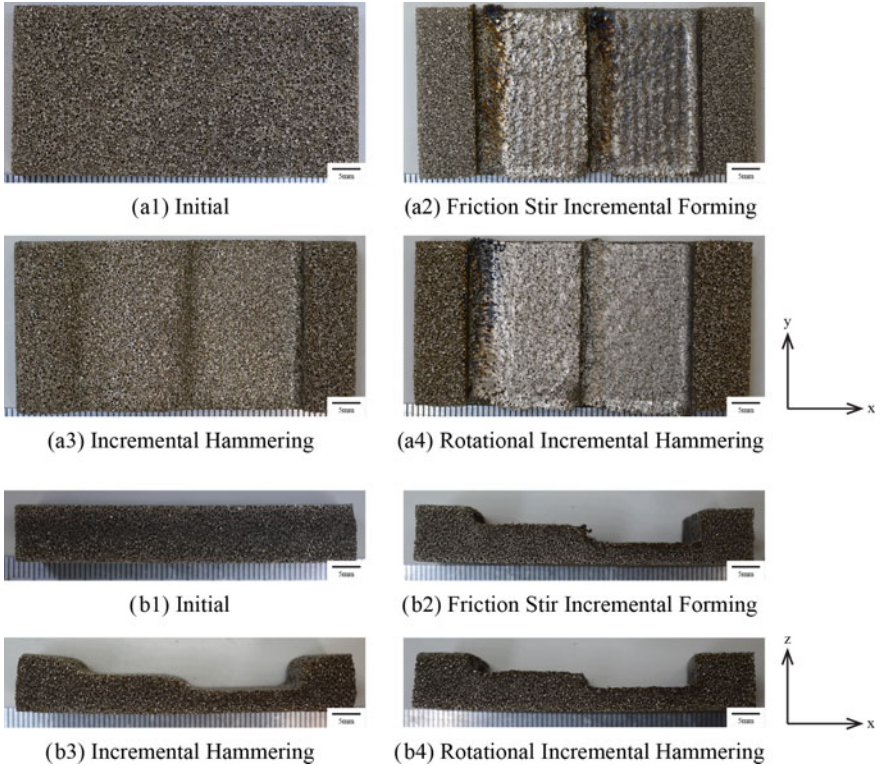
Photographs of a top view and b side view of formed specimens with different forming processes
